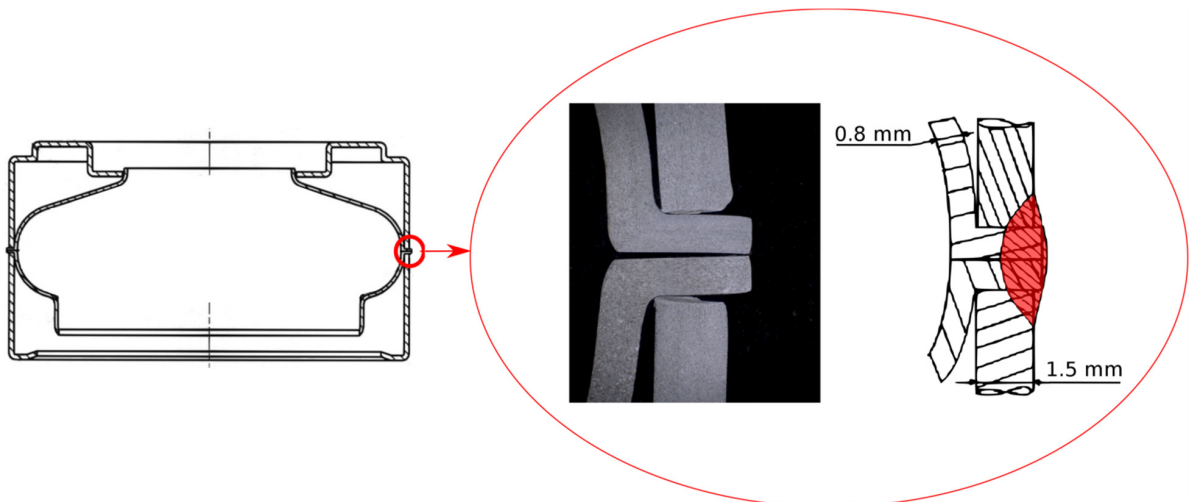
Cross section of the four sheets to be joined and a magnification of the weld and the physical joining.
